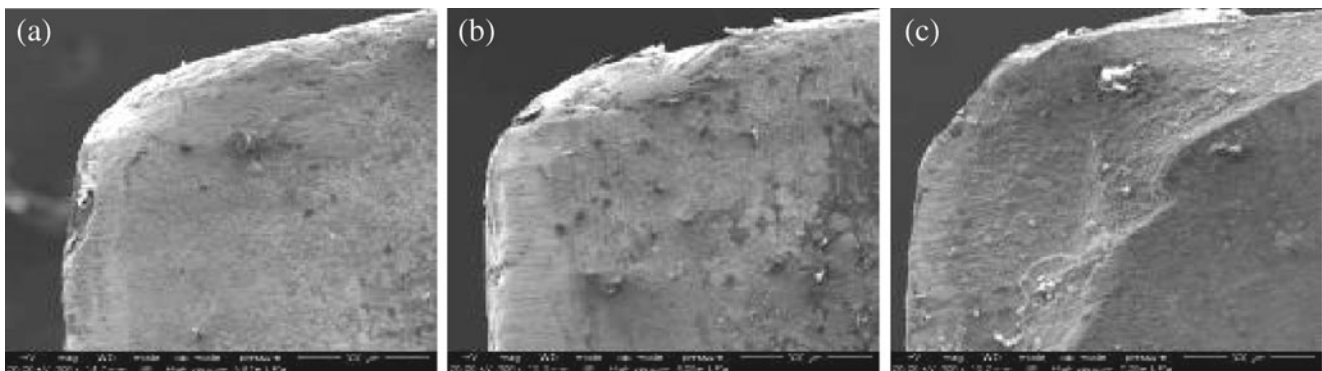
SEM photographs of rake faces of YW1 cemented carbide tool. a 5, b 10, c 15 min
